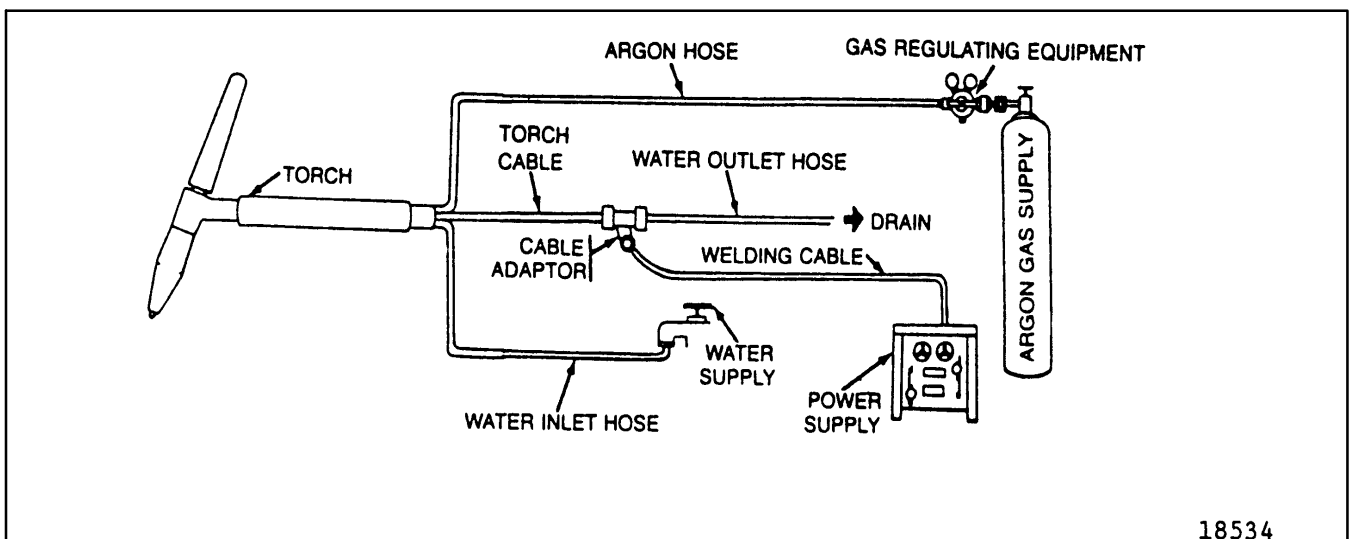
Gas Tungsten-Arc Welding Setup
